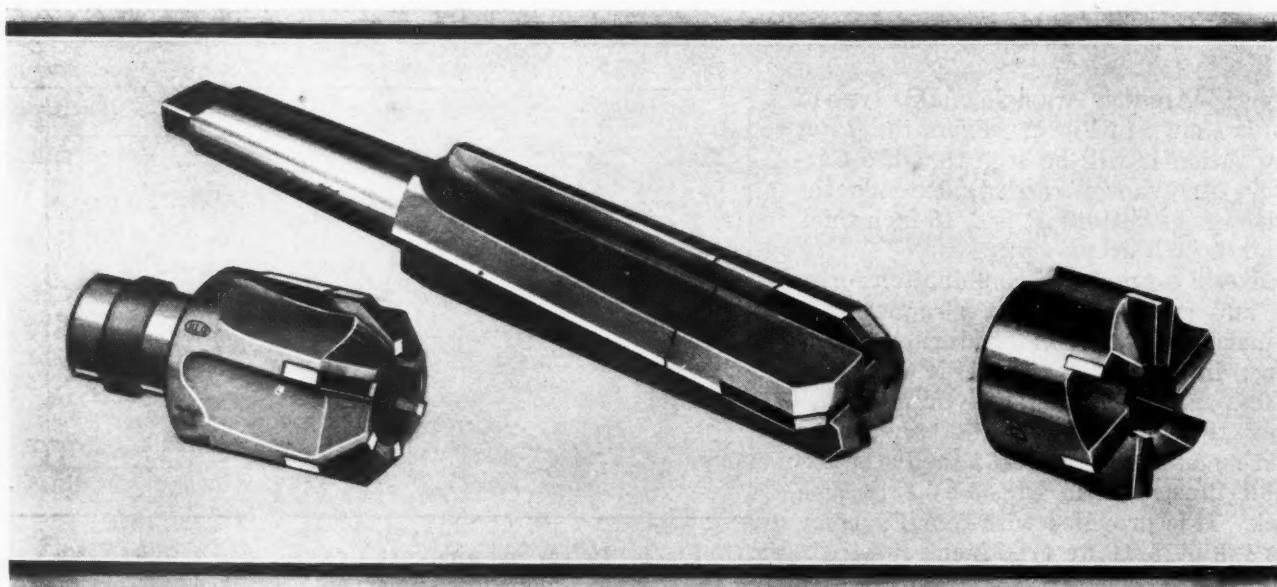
Chamfering Tool, Core-drill, and Spot-facer which have Proved Especially Satisfactory on Cast Iron
